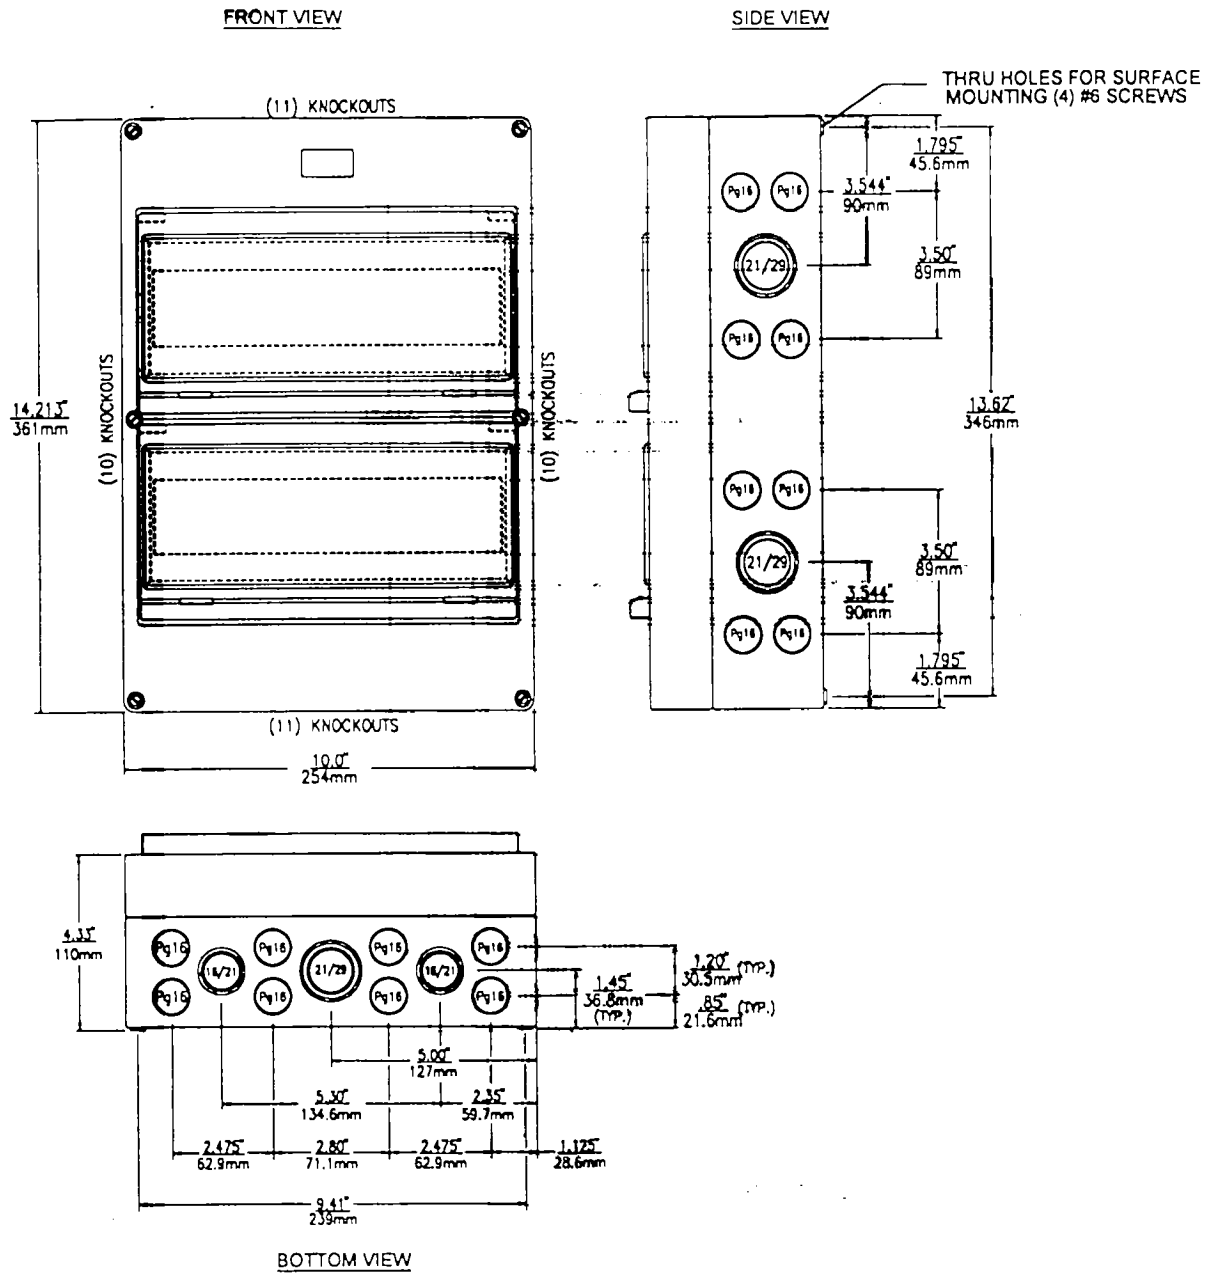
Six Module System Enclosure Dimensions (80-0008R, Rev-A)
